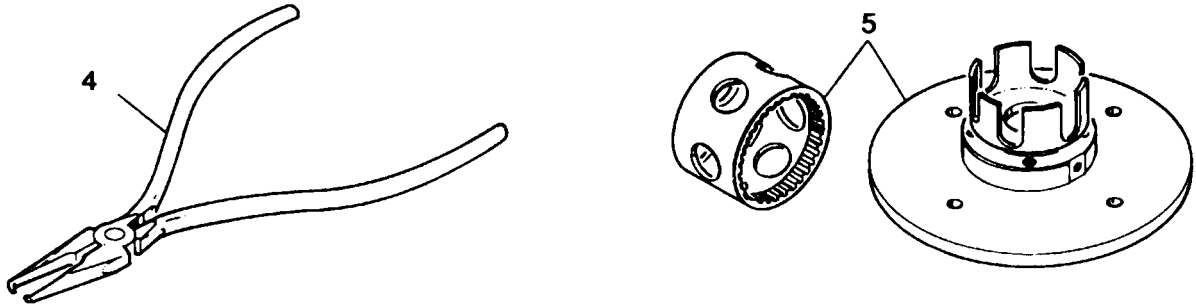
SPECIAL TOOLS (SHEET 2 OF 2)
